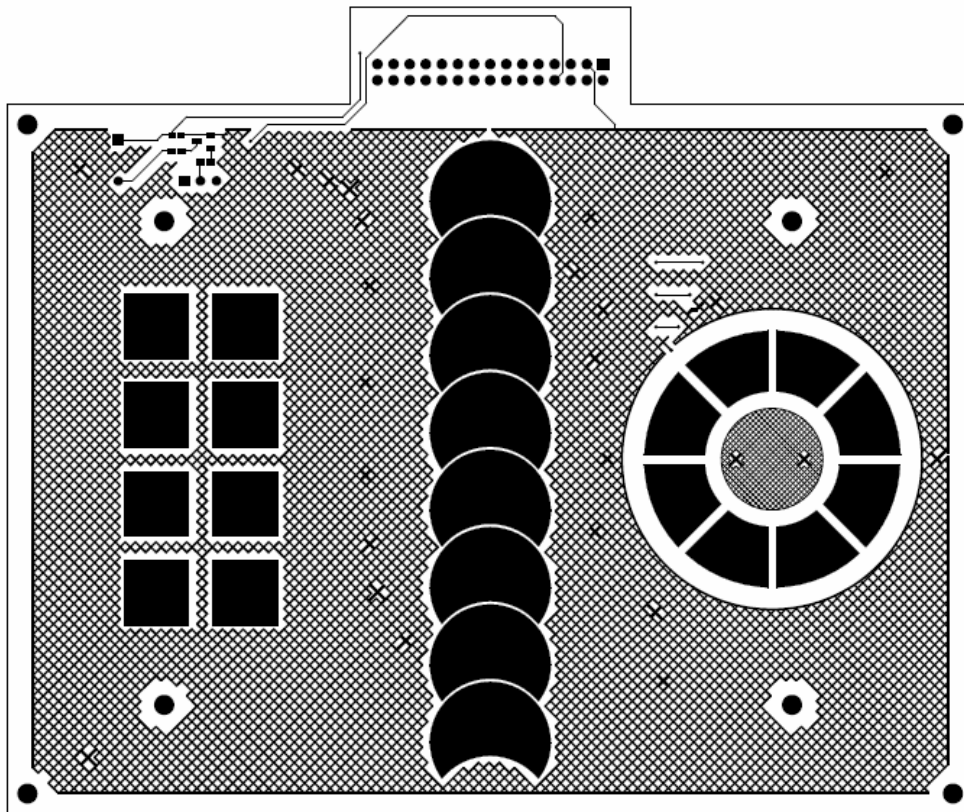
PROXIMITYBOARD0 Board Top Etch View
